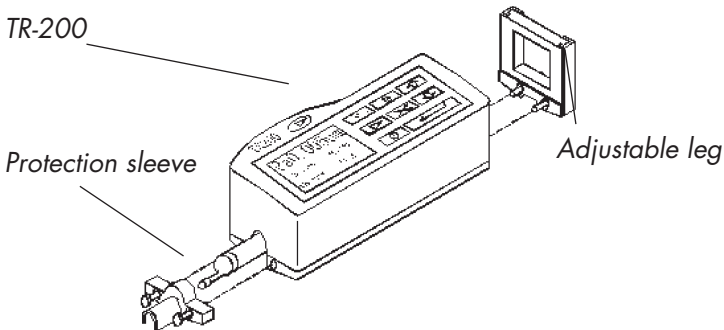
Connections of adjustable supporter and sheath of pickup
